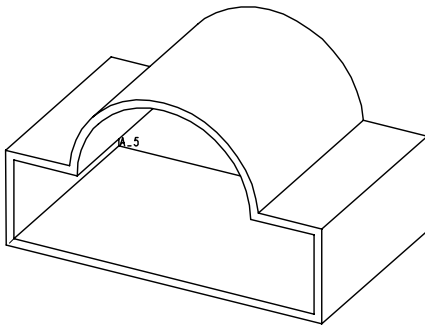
Datum axis created on the edge where the two selected planes meet
